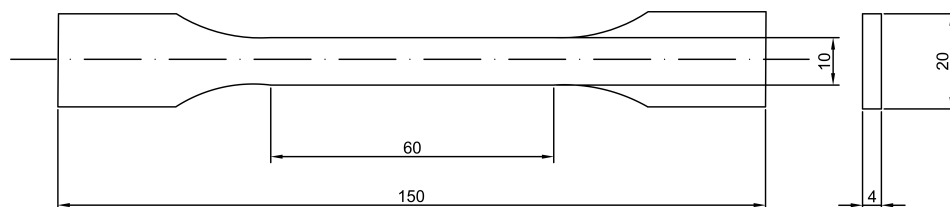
Geometry of the dog-bone specimens employed in the tensile tests [236]. All dimensions are expressed in [mm].
